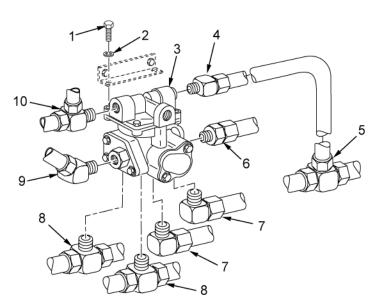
Location P, Pipe Sealant Compound to Male Threads Installation.
